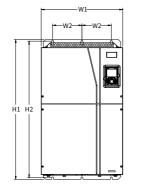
Flange mounting dimensions and hole positions for VFDs of 380V 132G-200G
